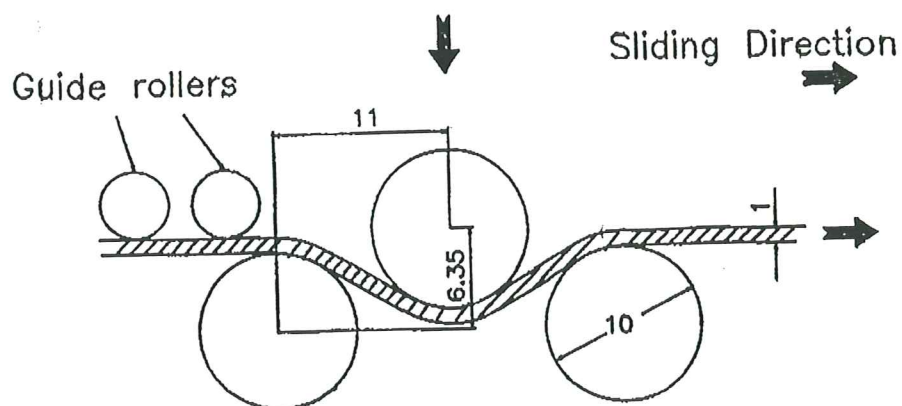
The Draw Bead Simulator test (DBS)
